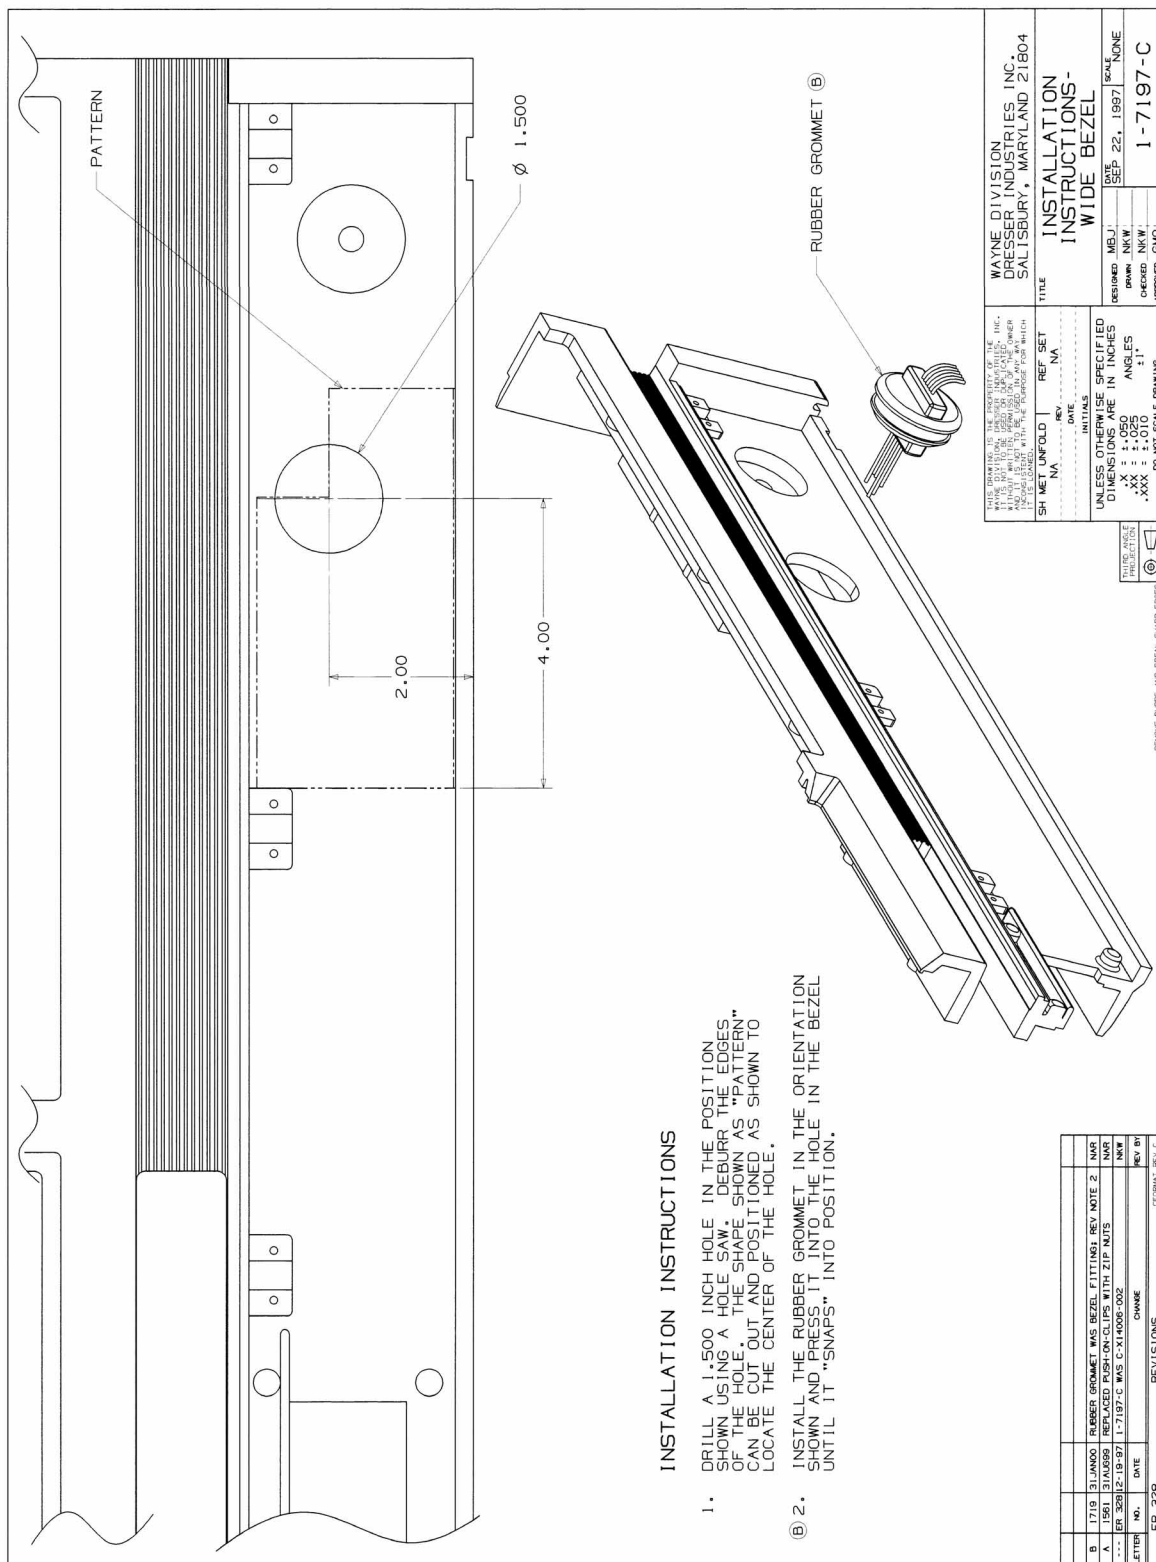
1-7197-C - INSTALLATION INSTRUCTIONS - WIDE BEZEL FITTING
